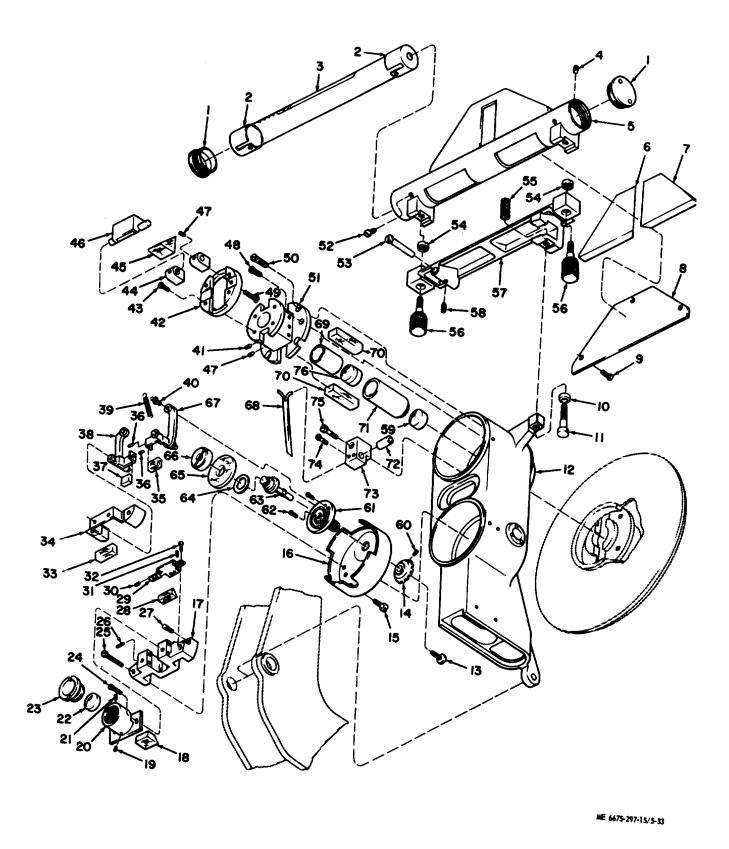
Vertical micrometer, collimation level assembly, and collimation lever housing; removal, disassembly, reassembly, and installation.
